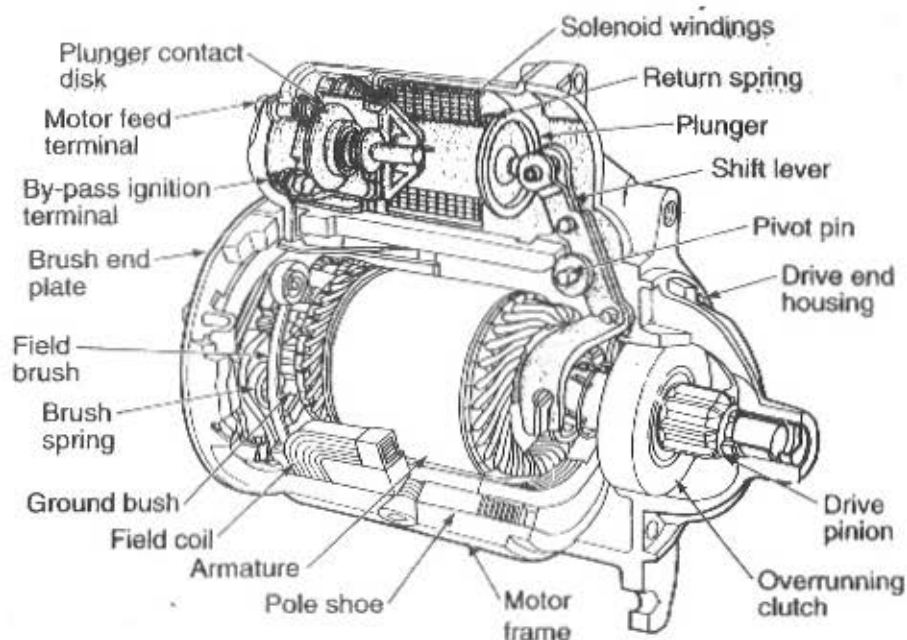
A solenoid-operated starter motor has the solenoid mounted directly to the motor.
